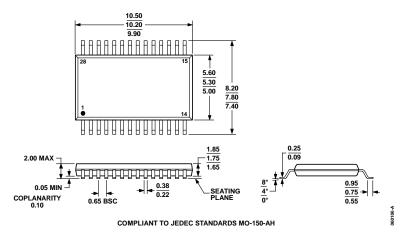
28-Lead Shrink Small Outline Package [SSOP] (RS-28) Dimensions shown in millimeters
